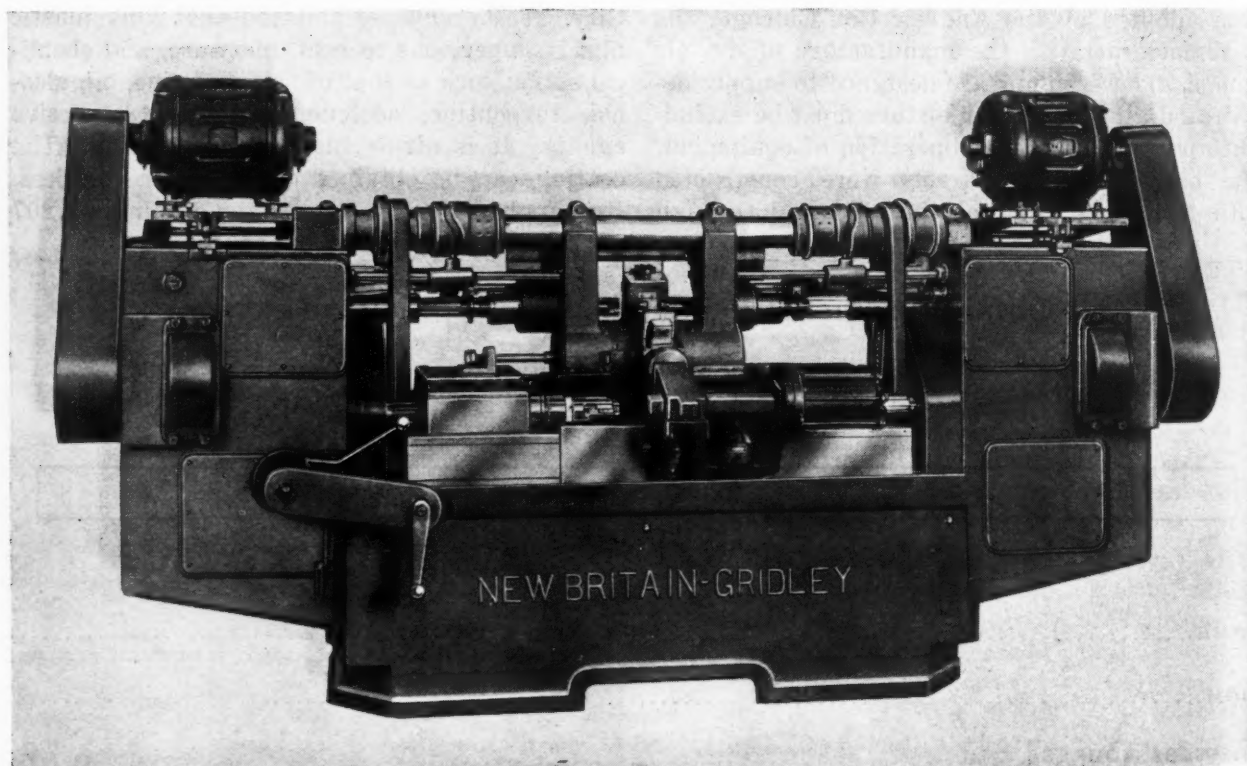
New Britain Double-end Six-spindle Tool-rotating Type Chucking Machine
